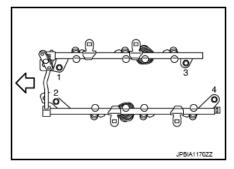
Fuel Tube Mounting Bolts Tightening Sequence Courtesy of NISSAN MOTOR CO., U.S.A.
